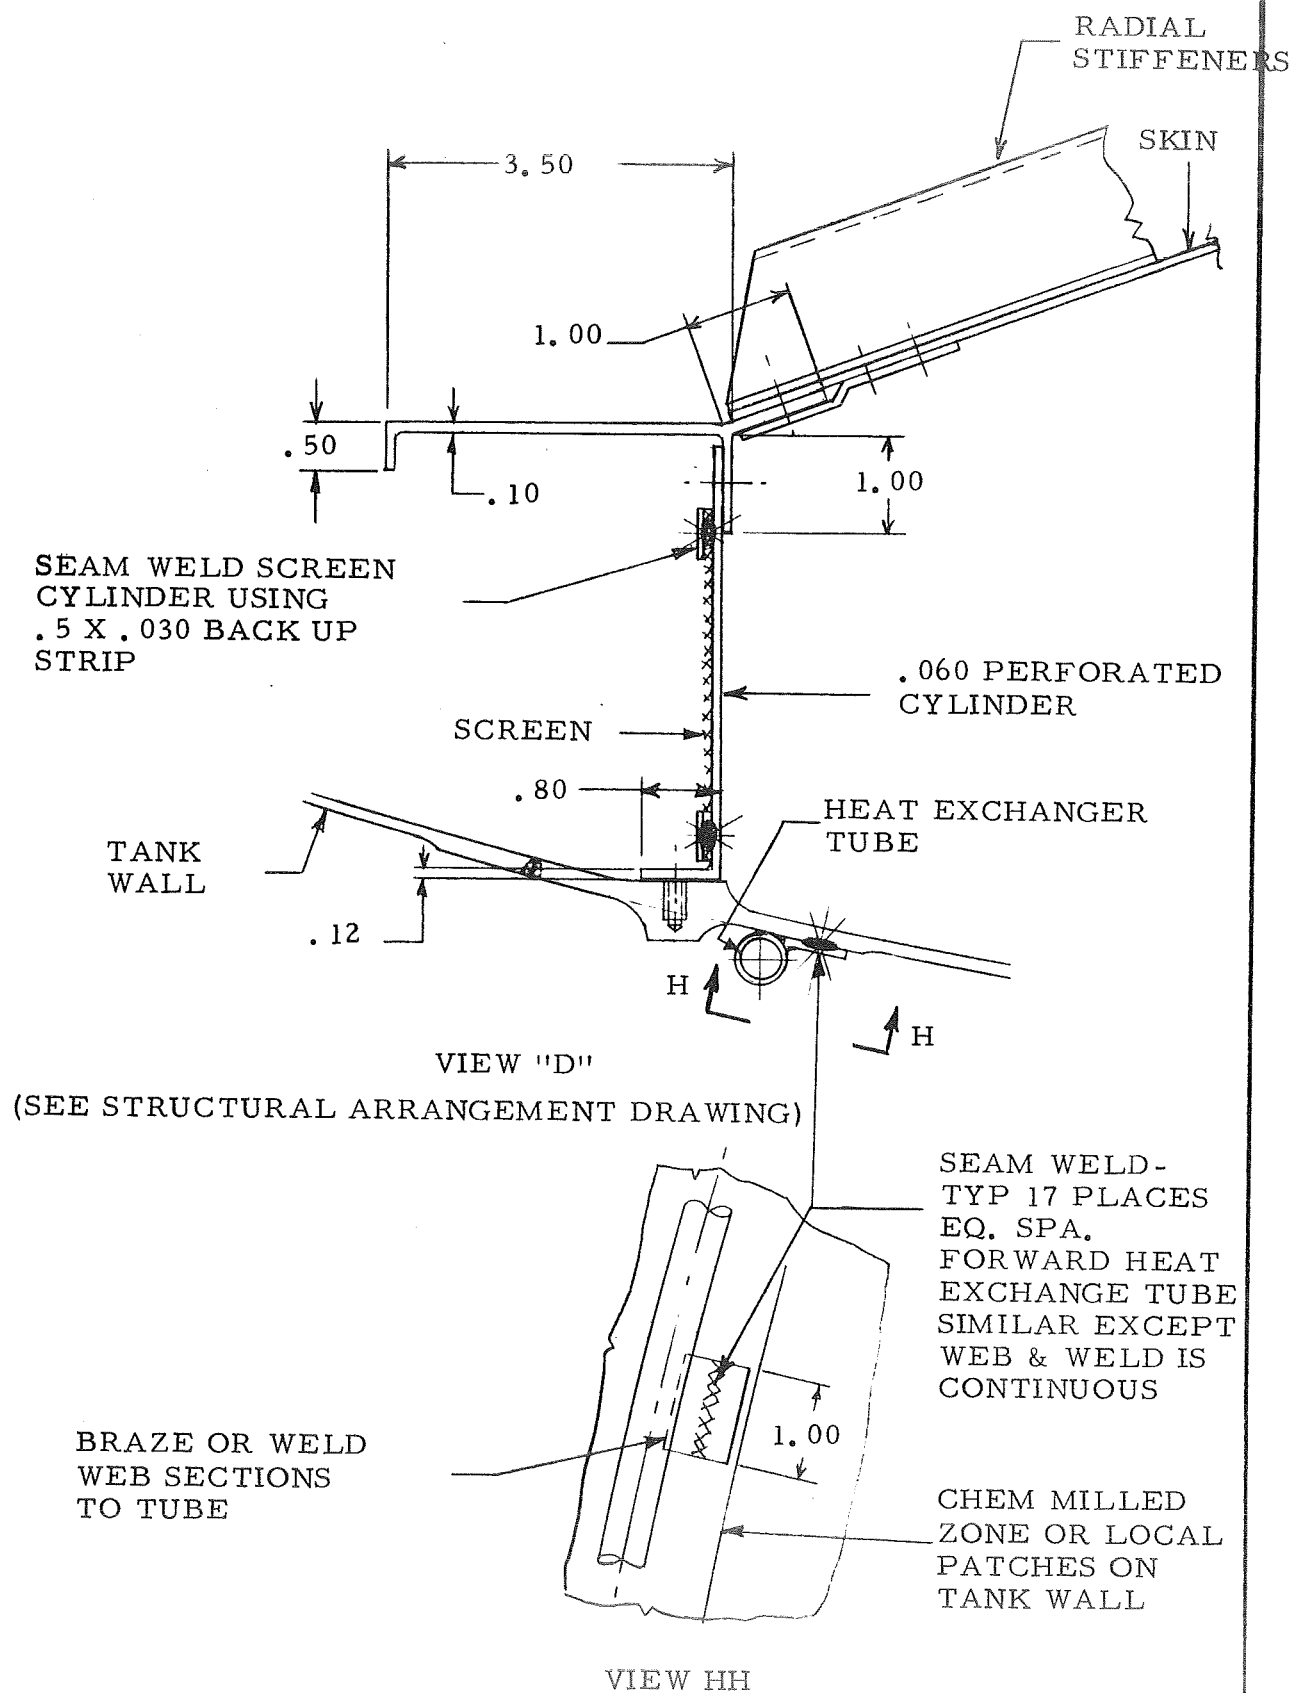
Oxidizer Tank Reservoir Structural Details.
